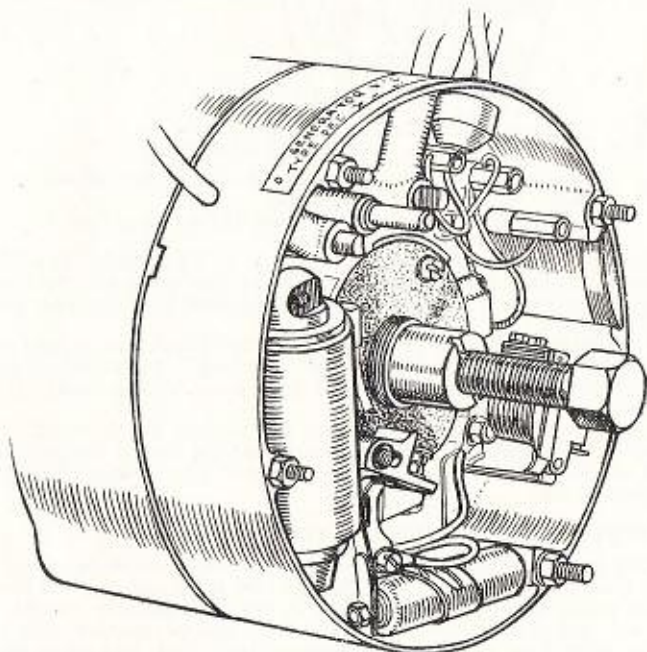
Showing the Generator Extractor Tool LET 646 in position. Read the instructions for this task very carefully or damage will be done.
